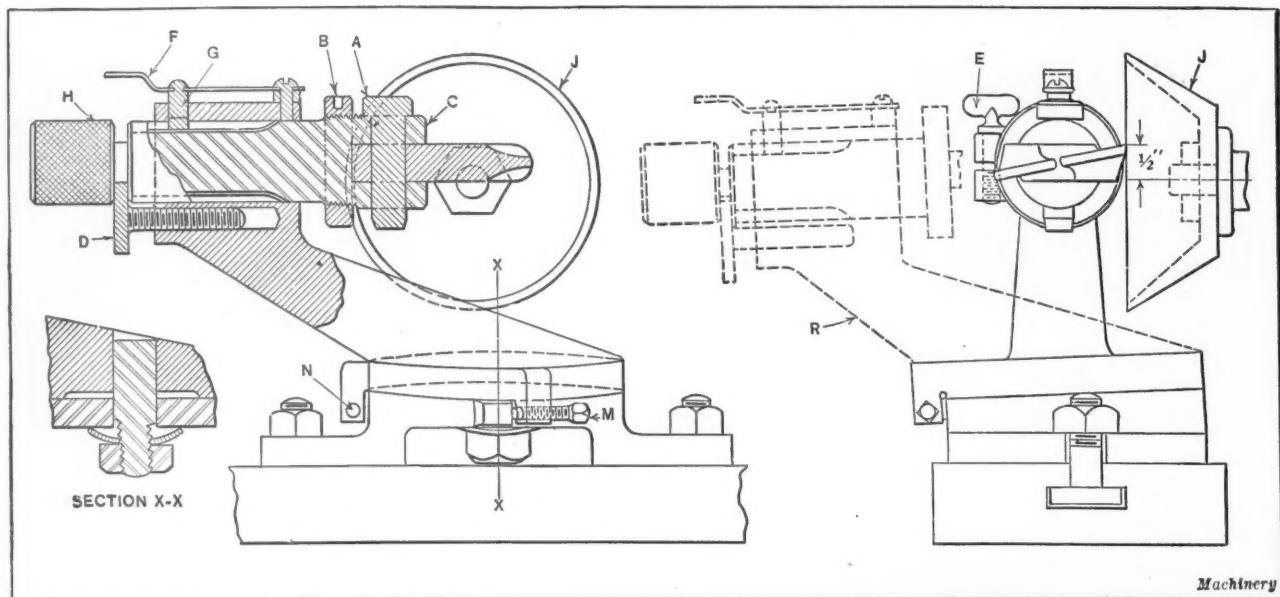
Details of Reamer-grinding Fixture, a Plan View of which is shown in Fig. 3
